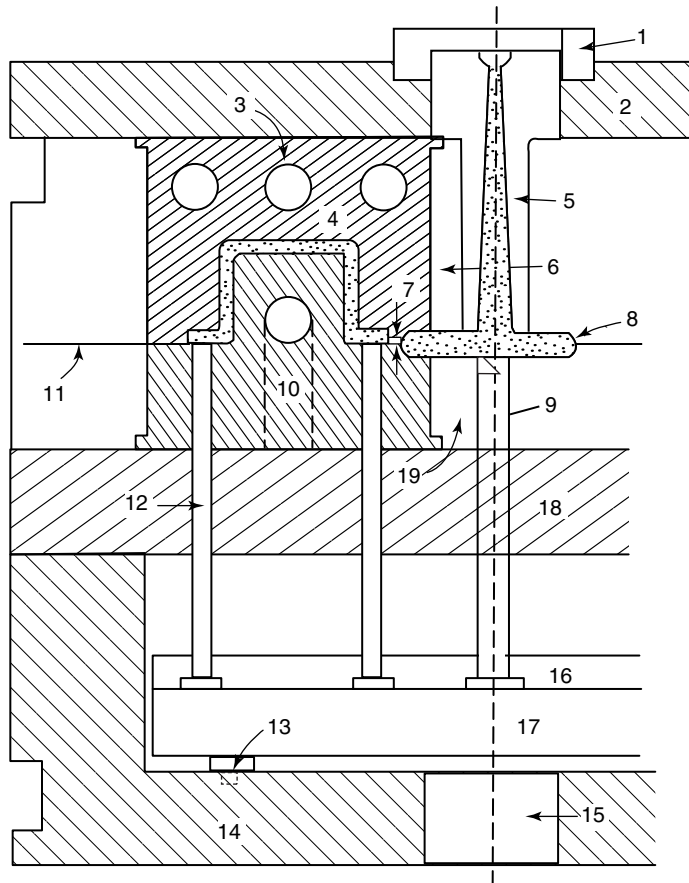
A two-plate injection-mold design: (1) locating ring; (2) clamping plate; (3) water channels; (4) cavity; (5) sprue bushing; (6) cavity retainer; (7) gate; (8) full round runner; (9) sprue puller pin; (10) plunger; (11) parting runner; (12) ejector pin; (13) stop pin; (14) ejector housing; (15) press ejector clearance; (16) pin plate; (17) ejector bar; (18) support plate; (19) plunger retainer.
